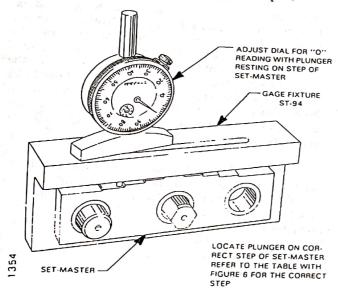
Depth Gage Adjusted with Set-Master Preparatory to Checking Line Position of Counterweight Bushings
